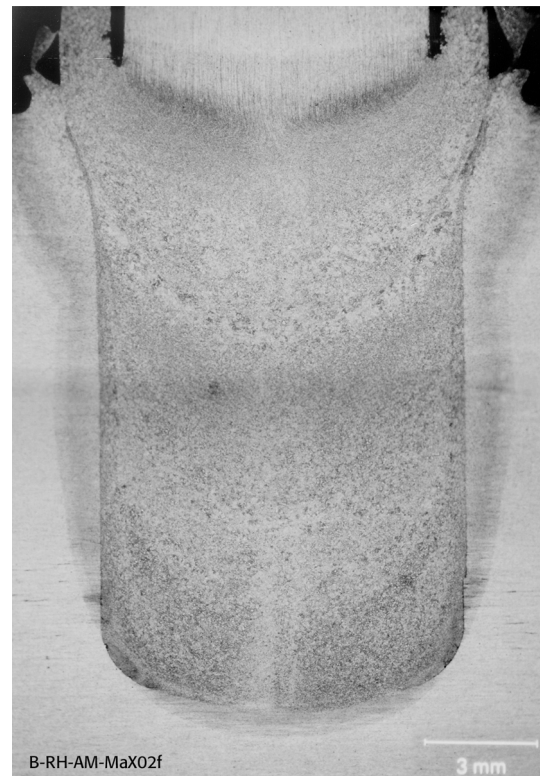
Macrograph of a weld in X65 with 8 mm stud diameter and rounded transition at the bottom of the hole.
